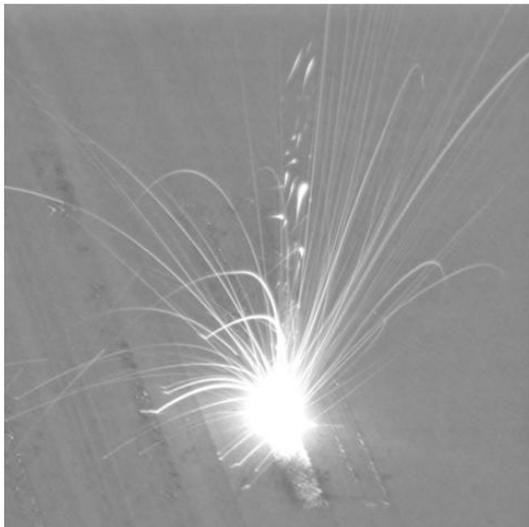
Weld spatter occurring during the build of an SLM test part
